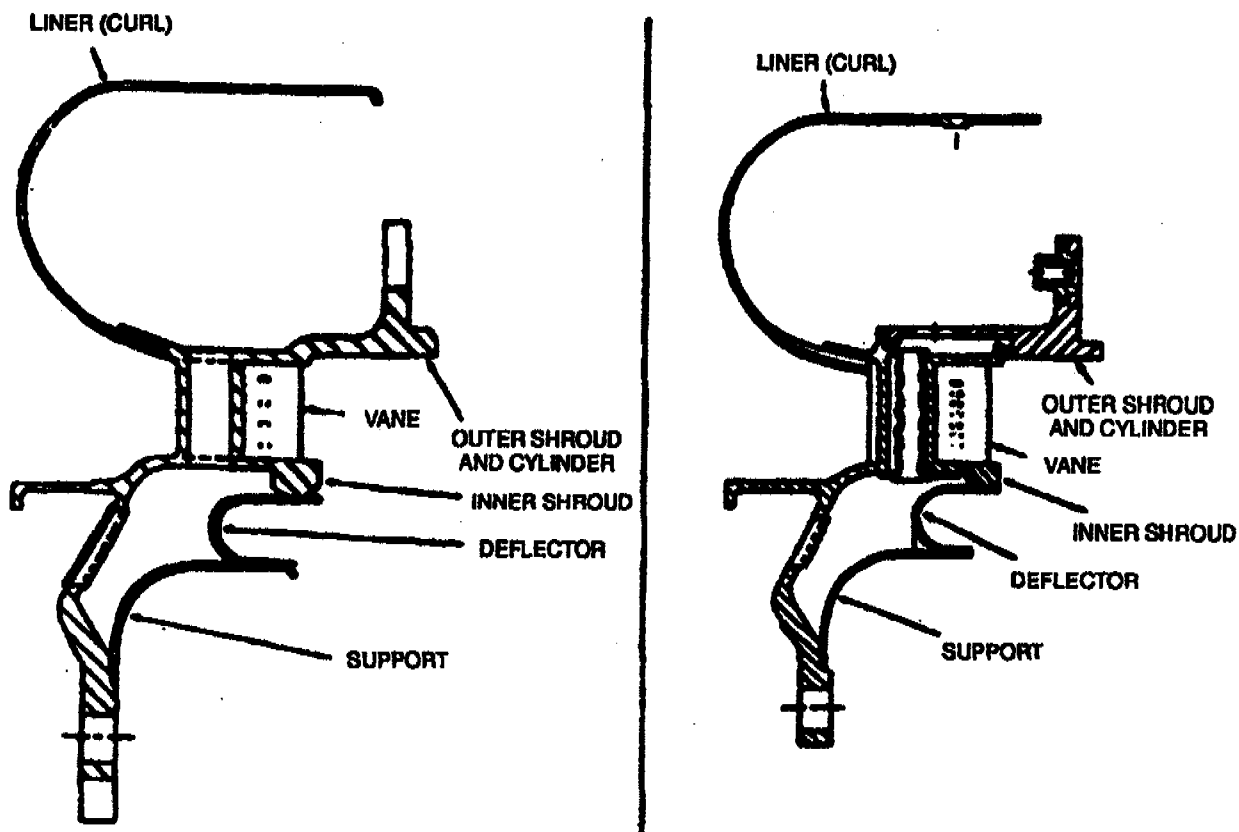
First Stage Gas Producer Nozzle Assembly Inspection Areas.
